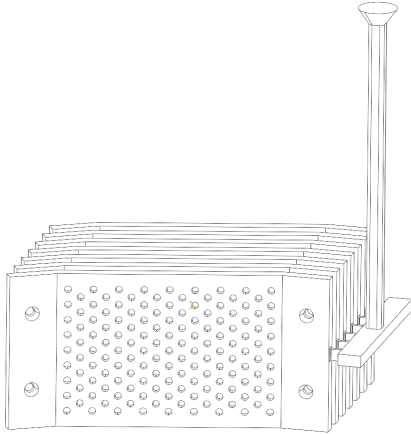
Three-dimensional assembly model of the middle-pour gating system and casting
